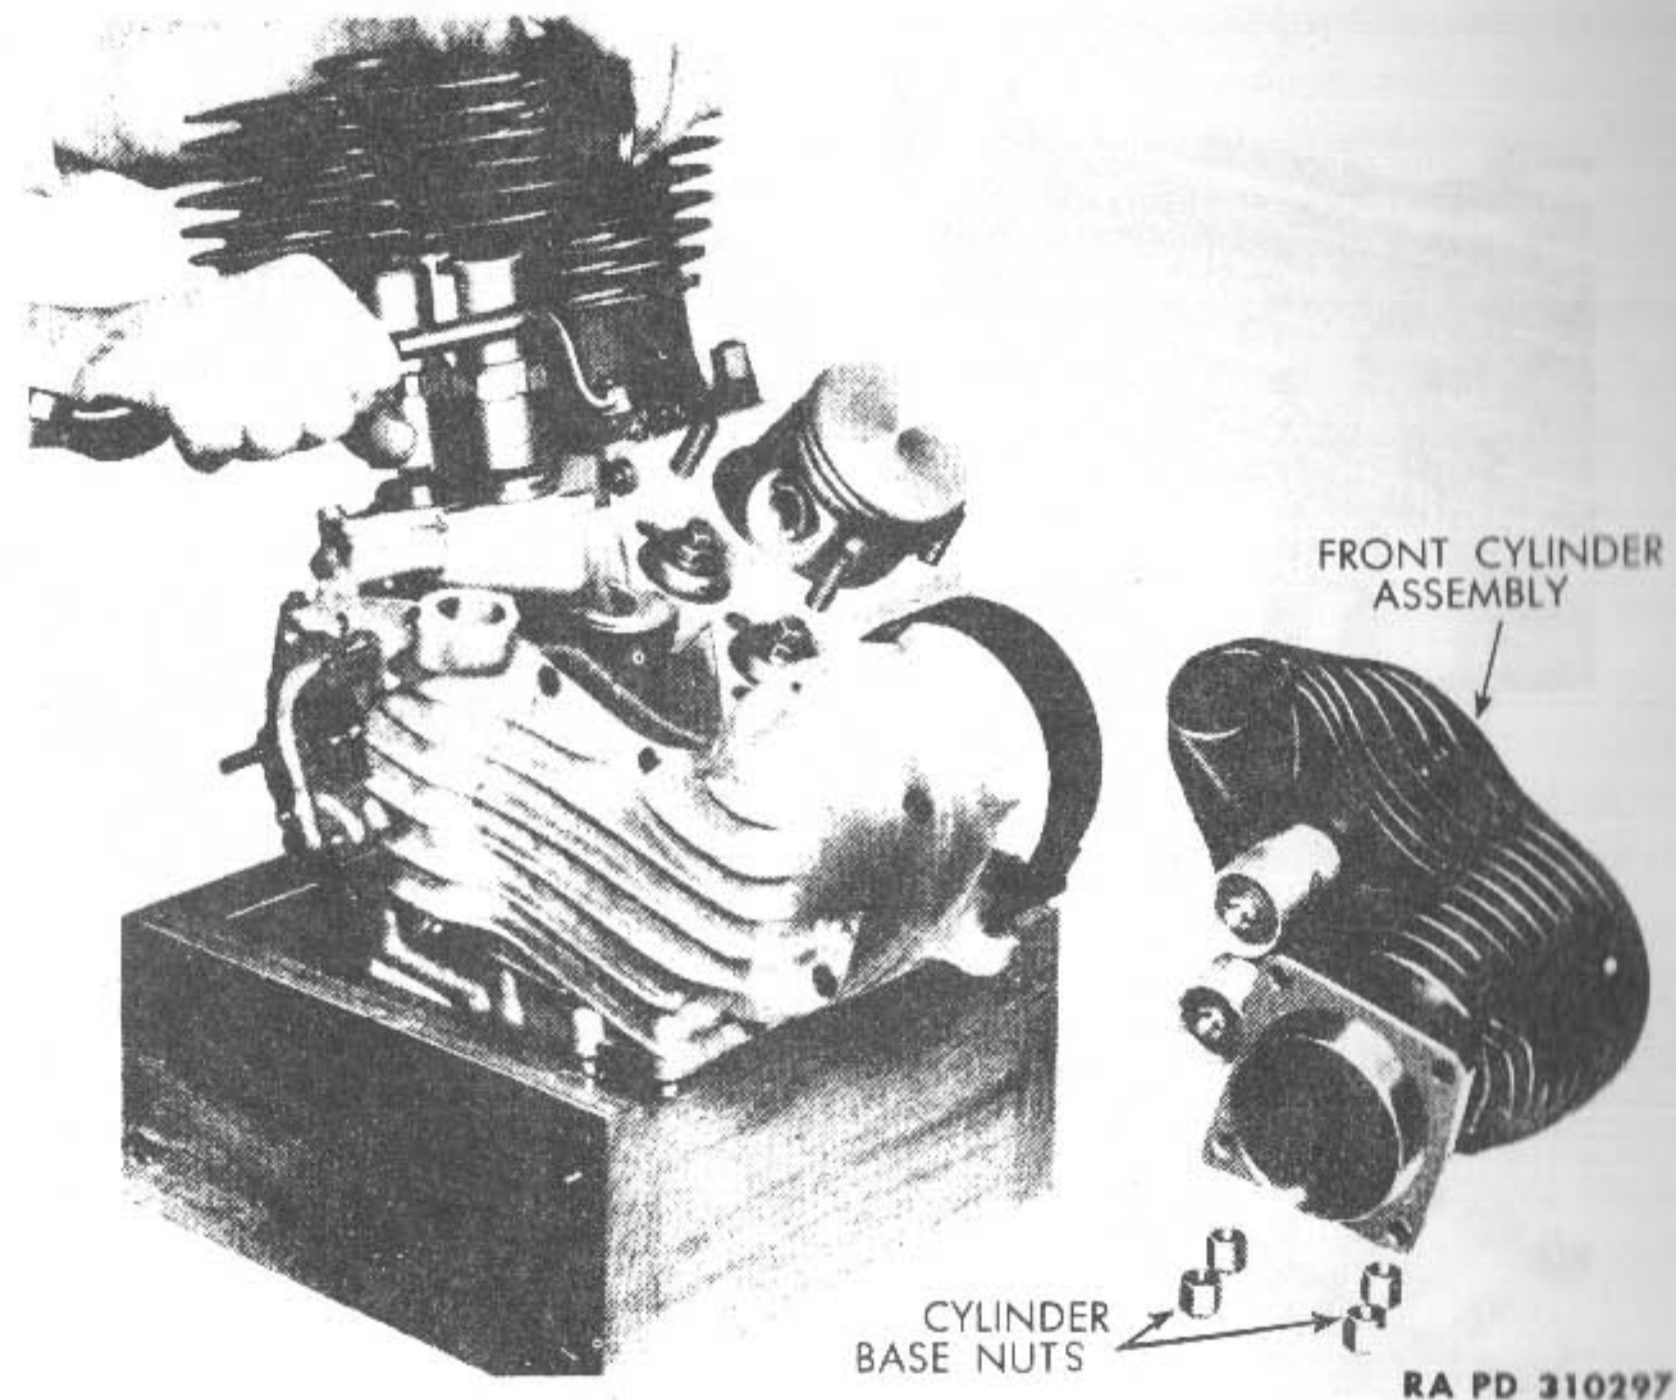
Removing Cylinder Base Nuts with Wrench (41-W-872-10)
